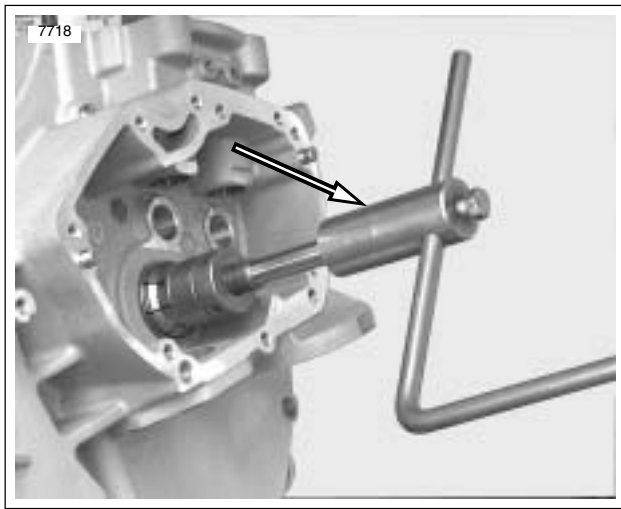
Lapping Pinion Shaft Main Bearing Using Crankcase Main Bearing Lapping Tool (Part No. HD-96710-40B)
